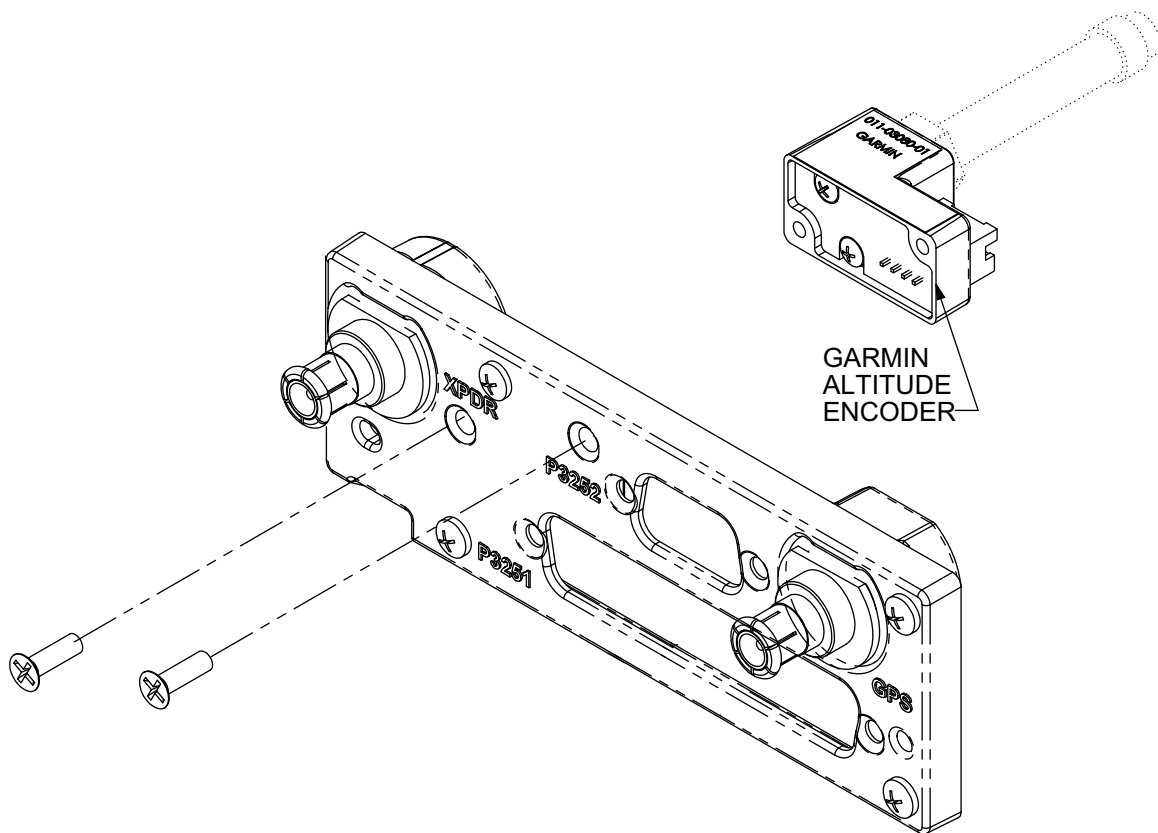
Garmin Altitude Encoder with Back Plate Assembly
